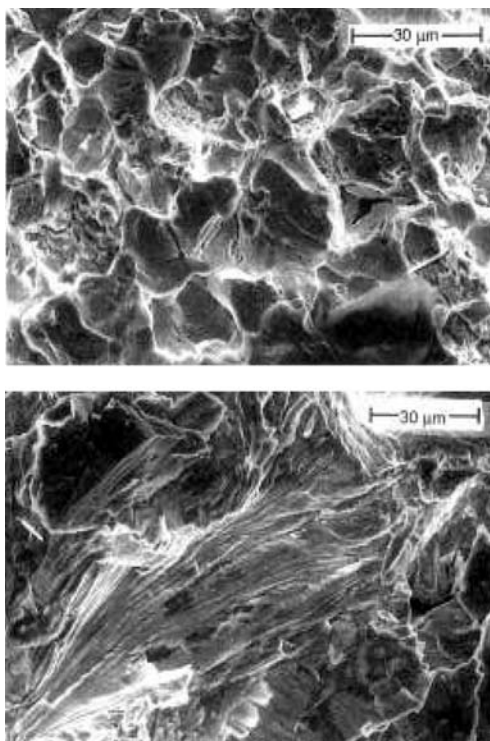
Fracture surfaces from stress corrosion cracking: (a) intergranular fracture of carbon steel in an alkaline environment at 70 °C; (b) transgranular fracture of stainless steel (DIN 1.4439) in chloride medium at 100 °C.
